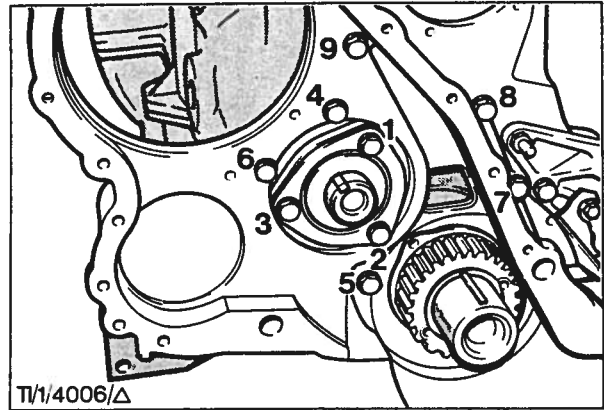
Timing Gear Housing Bolt Tightening Sequence - 2728T Engines
